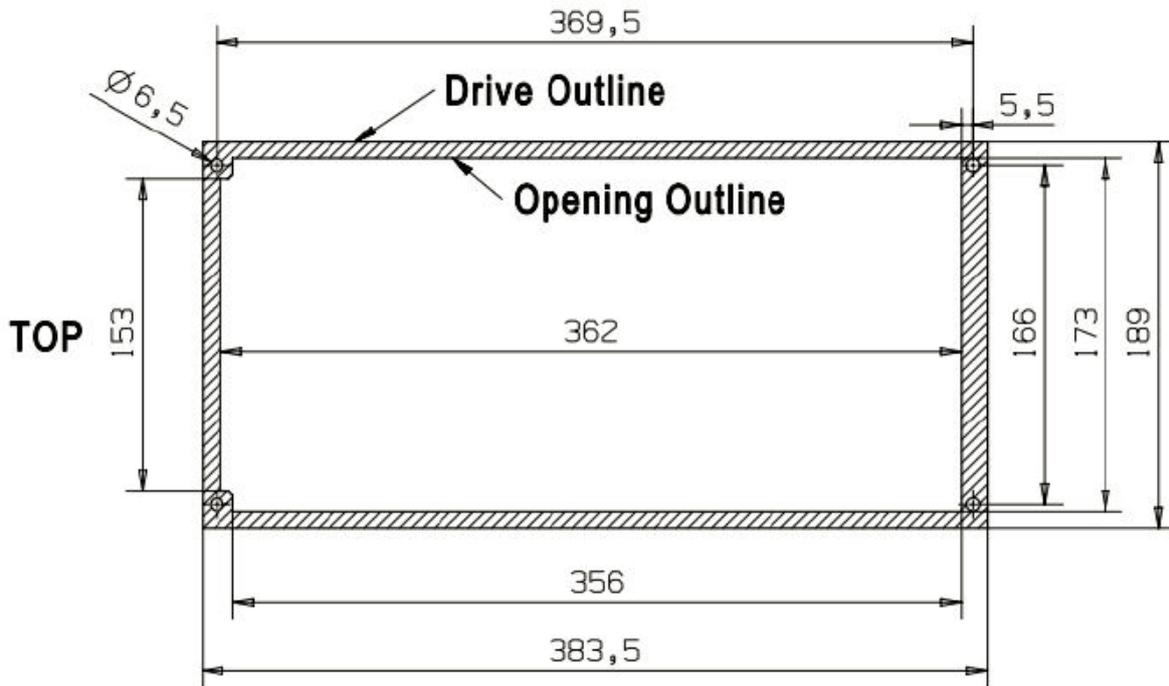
Flange mounting cutout dimensions for MI4 (Unit: mm)
